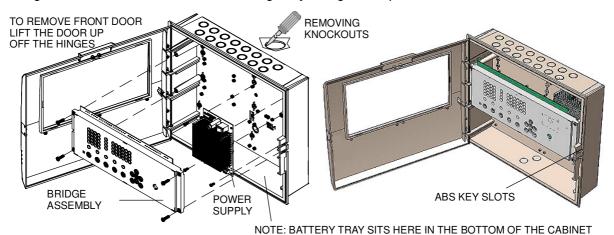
Explode and Assembled View for the ABS Model FACP Note: The Metal Cabinet (BX10) is assembled in the same fashion
